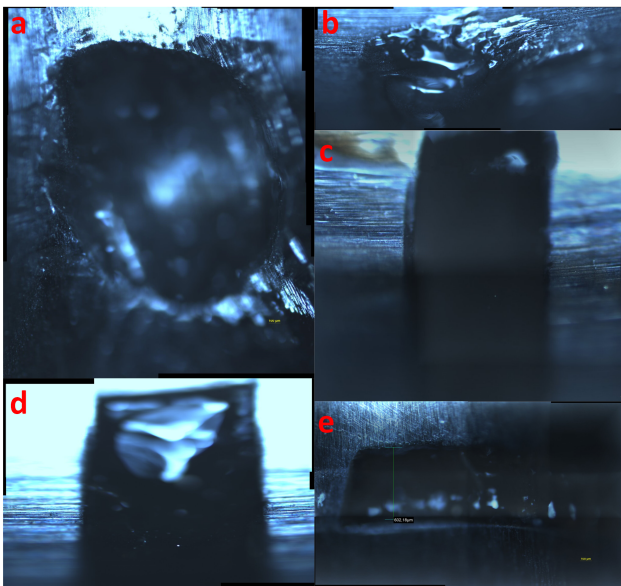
Microscopic view of bearing faults: a) Incipient version IR fault of bottom bearing, b) Incipient version OR fault of bottom bearing, c) Laser version 0.5 OR fault of top bearing, d) Laser version 1.0 OR fault of bottom bearing, e) Laser version 0.5 IR fault of bottom bearing.
